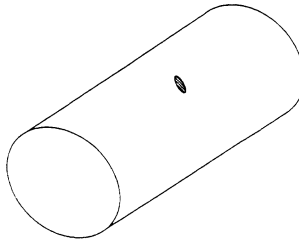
, Elliptical contact zone between the drive-bar and one drive-roller surface.
